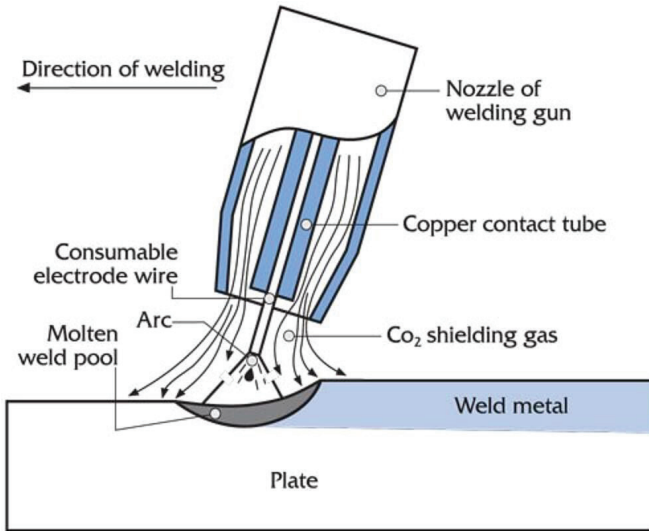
Gas Metal Arc Welding (GMAW) parts in illustrated (*galvanizeit.org, 2023*).
